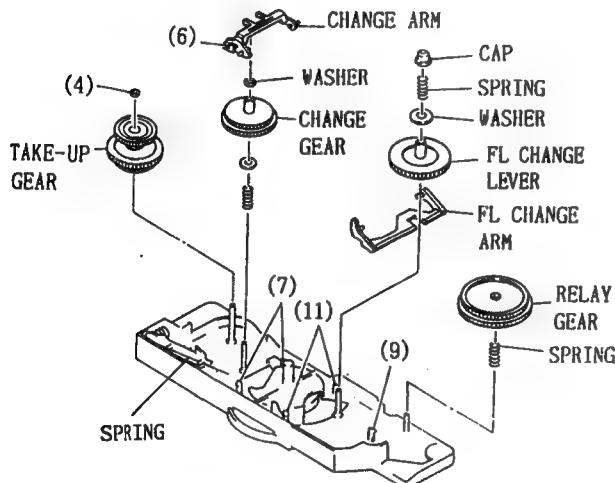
Take-up Gear, Change Arm, Change Gear, Relay Gear, FL Change Gear and FL Change Lever
